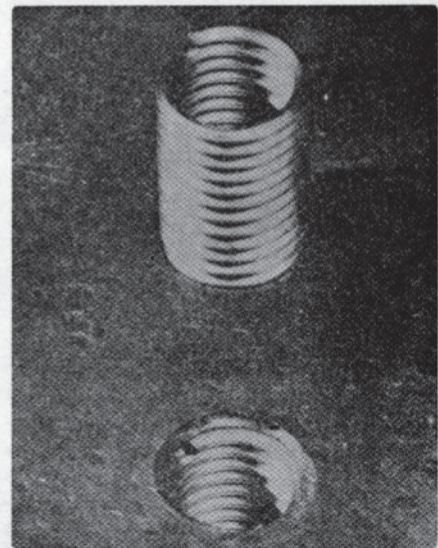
A thread insert and a complete repair are shown above. Special tools are provided in thread repair kit for installation of thread insert.
